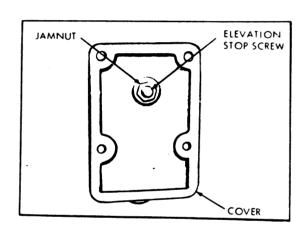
Gunner's control disassembly or assembly (1 of 6)
